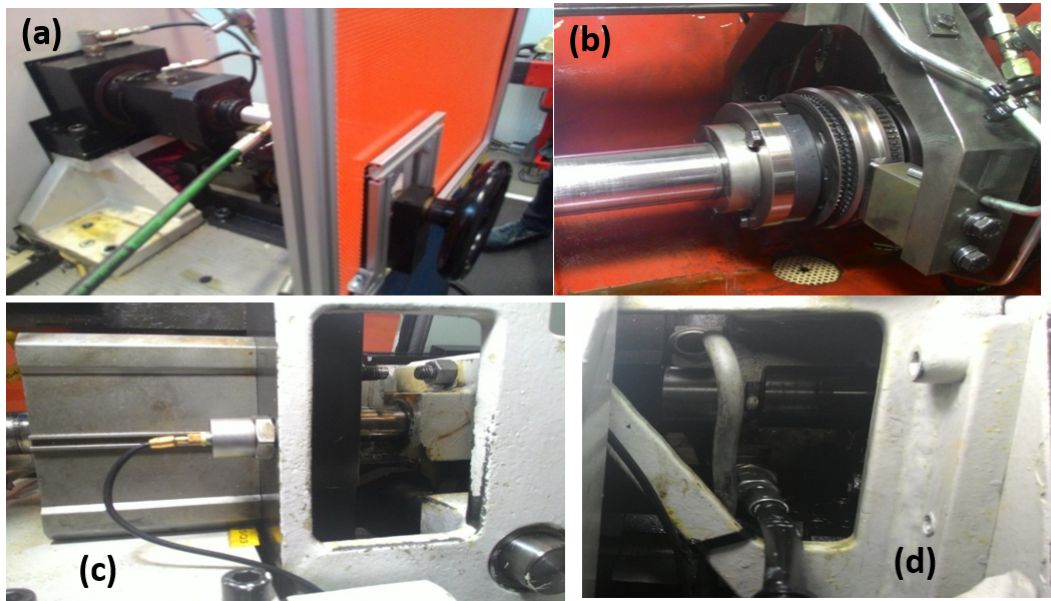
(a) Lubrication system, (b) the fork mechanism, (c) the actuator and (d) The position of load cell.
